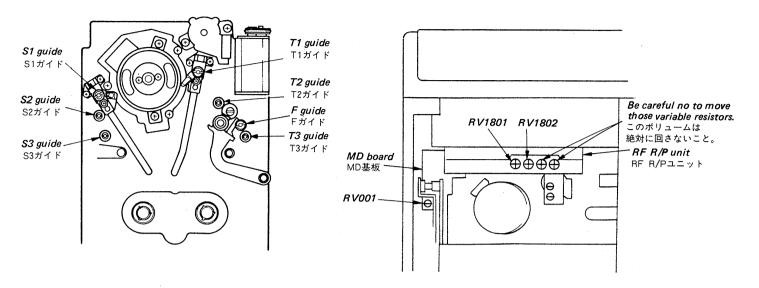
Mechanism assembly 図 -1 メカニズム Assy
